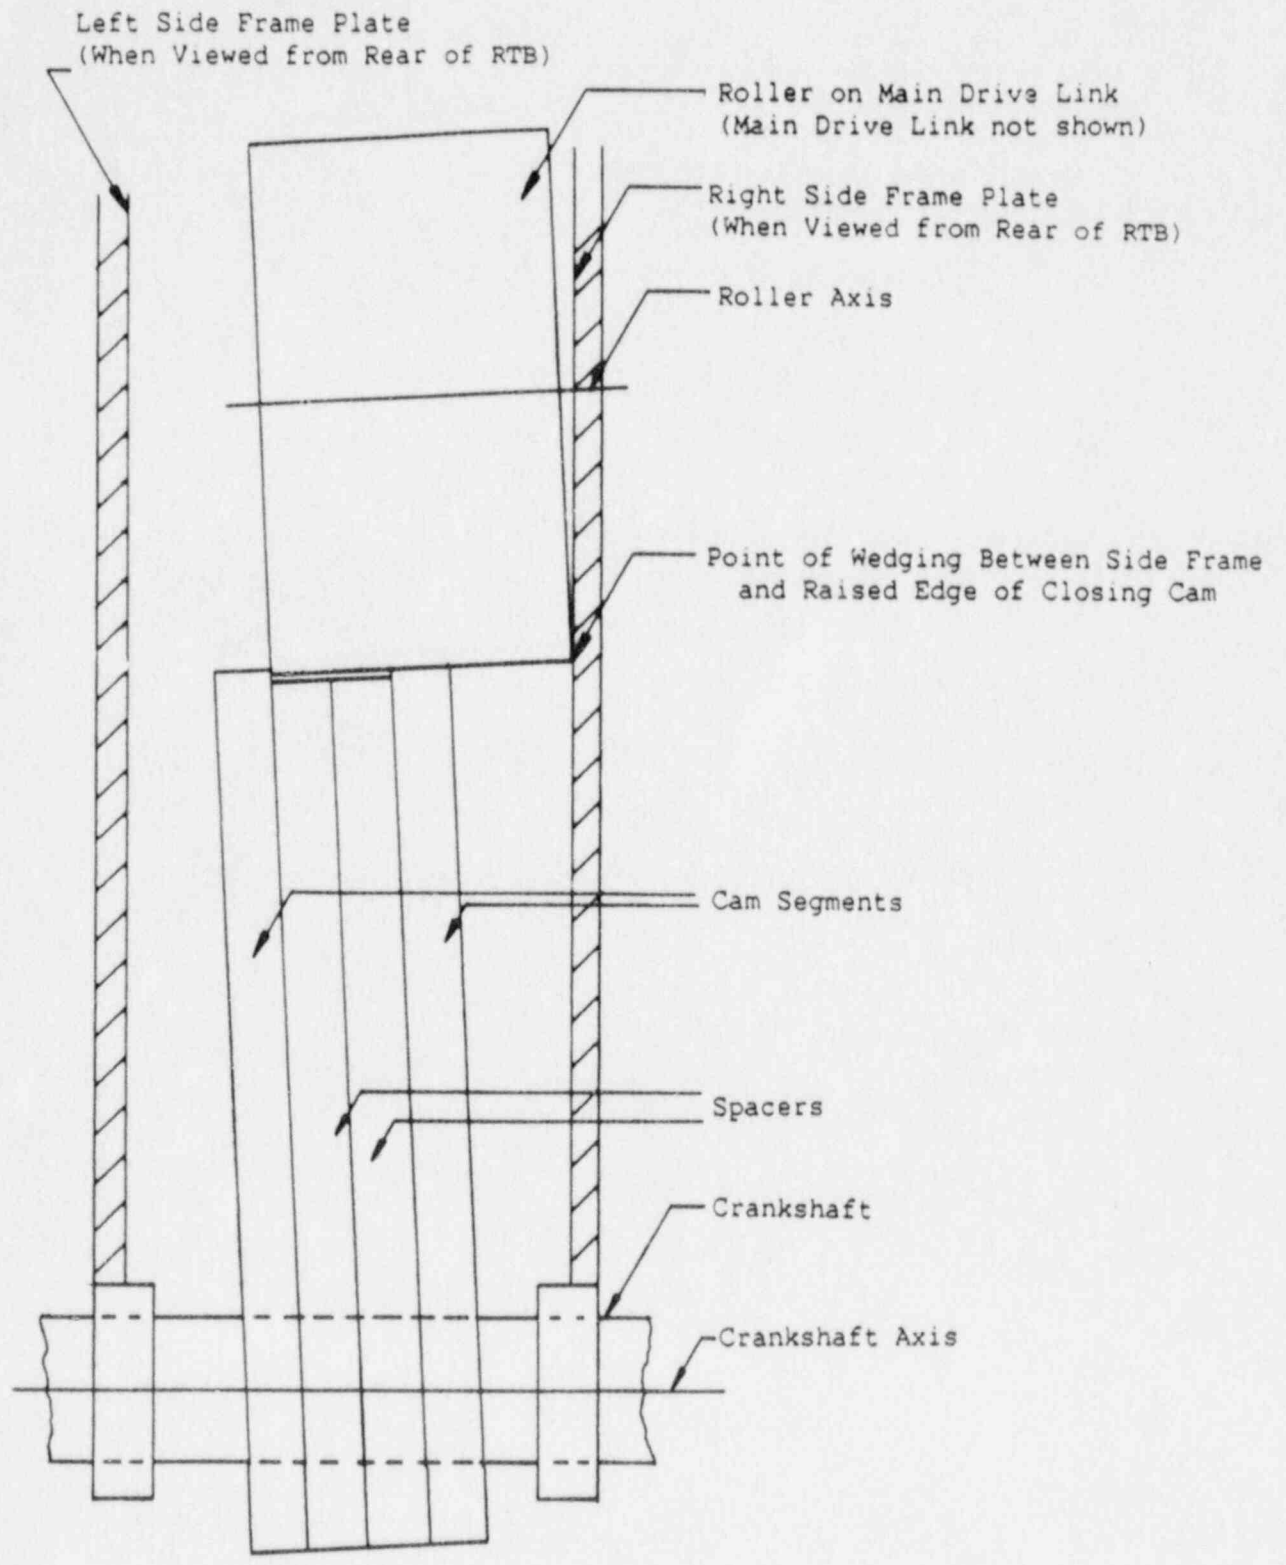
Roller Wedged Between Left Cam Segment and Right Side Frame Plate
